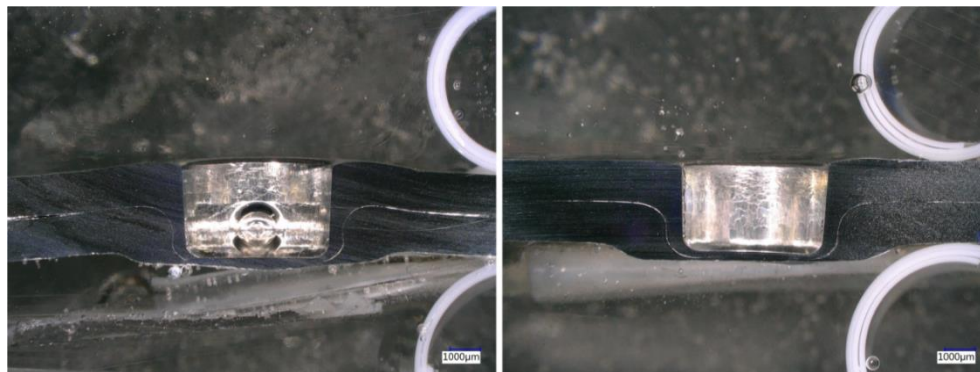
Optical images of mounted cross-sections through joints made by using blank holder B with groove depth 25 % (on the right) and 20 % (on the left) of the sheet thickness. The sheet metal was in full annealed conditions. Using groove 15 % depth, results in higher protrusion and failure of interlock formation.
